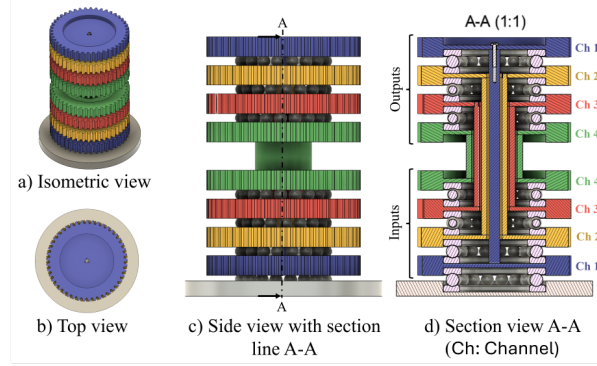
Technical drawing and sectional view of the 4-channel coaxial rotary system.
